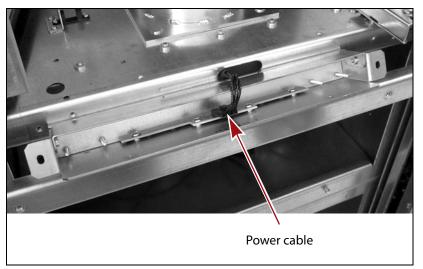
Disconnect the power cable from the LED assembly (lower LED assembly shown).
